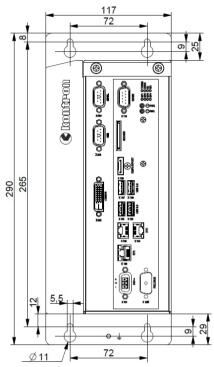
Dimensions: Front side with keyholes (KBox C-101-0)
